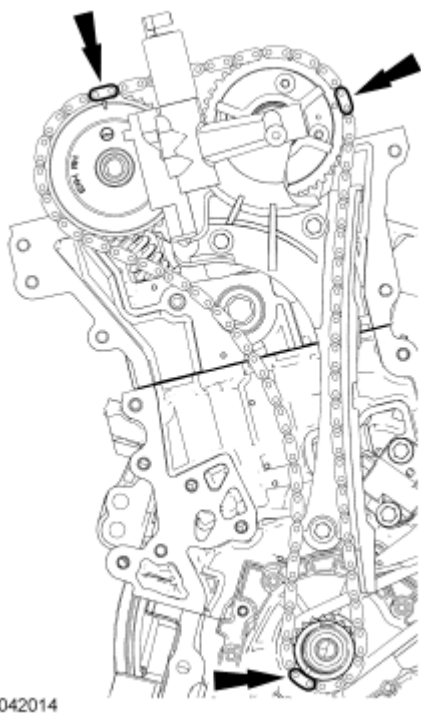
Aligning Marks On Timing Chain With Marks On Camshaft And Crankshaft Sprockets
